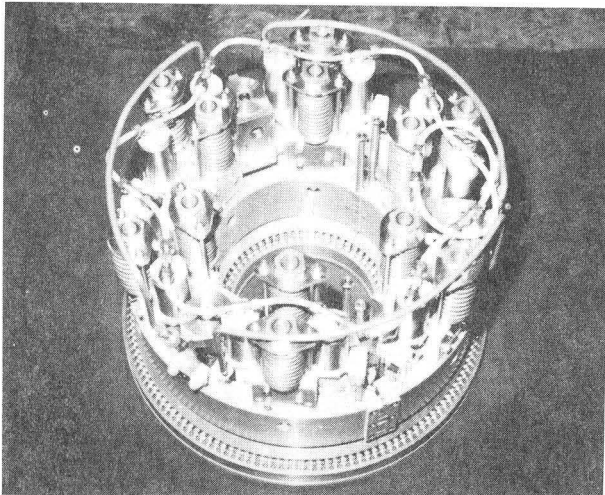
Sliding short fully assembled on the dummy coaxials support.
